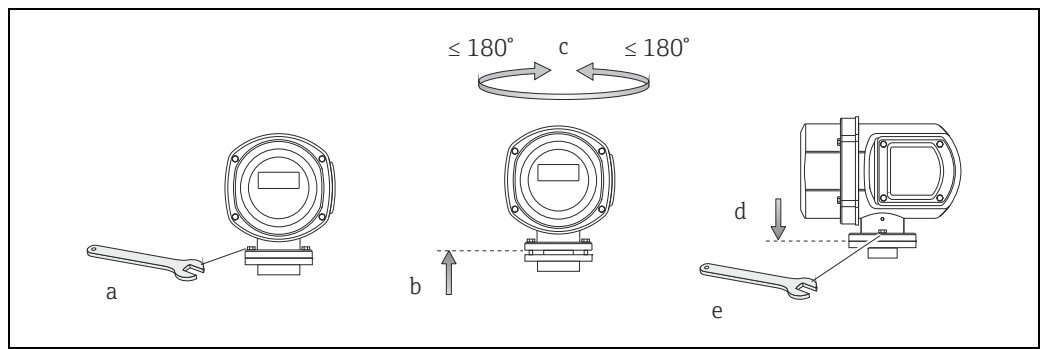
Turning the transmitter housing (stainless steel field housing)
